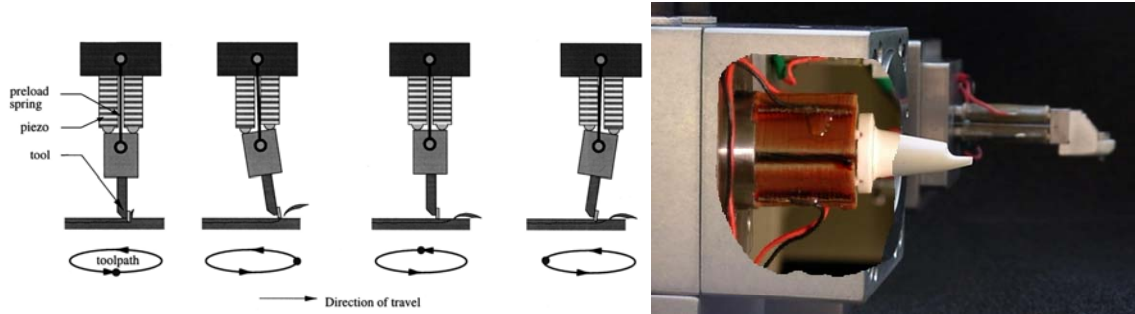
Concept of the Ultramill (left) and photograph of the two prototypes developed (right) in the cutaway in Figure 2. This system allows the UltraMill to operate continuously at 4000 Hz.
